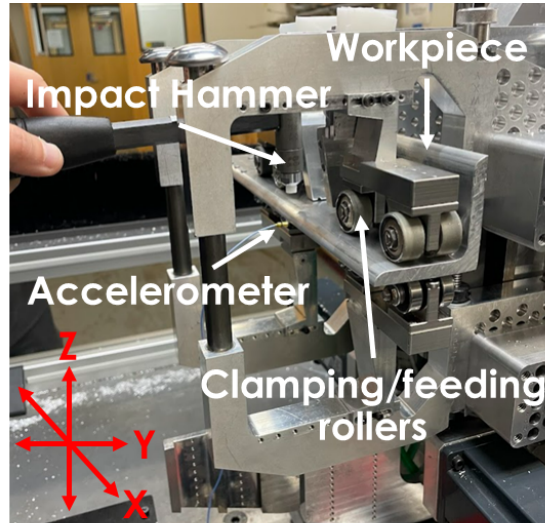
Setup for impact testing of workpiece held in universal feeding fixture. Impact testing is illustrated in the Z direction.
